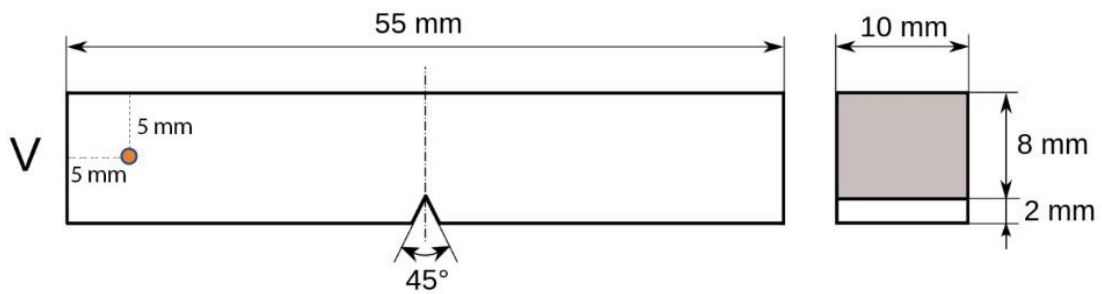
Charpy specimen geometry with drilling position for the thermocouple to be inserted.
